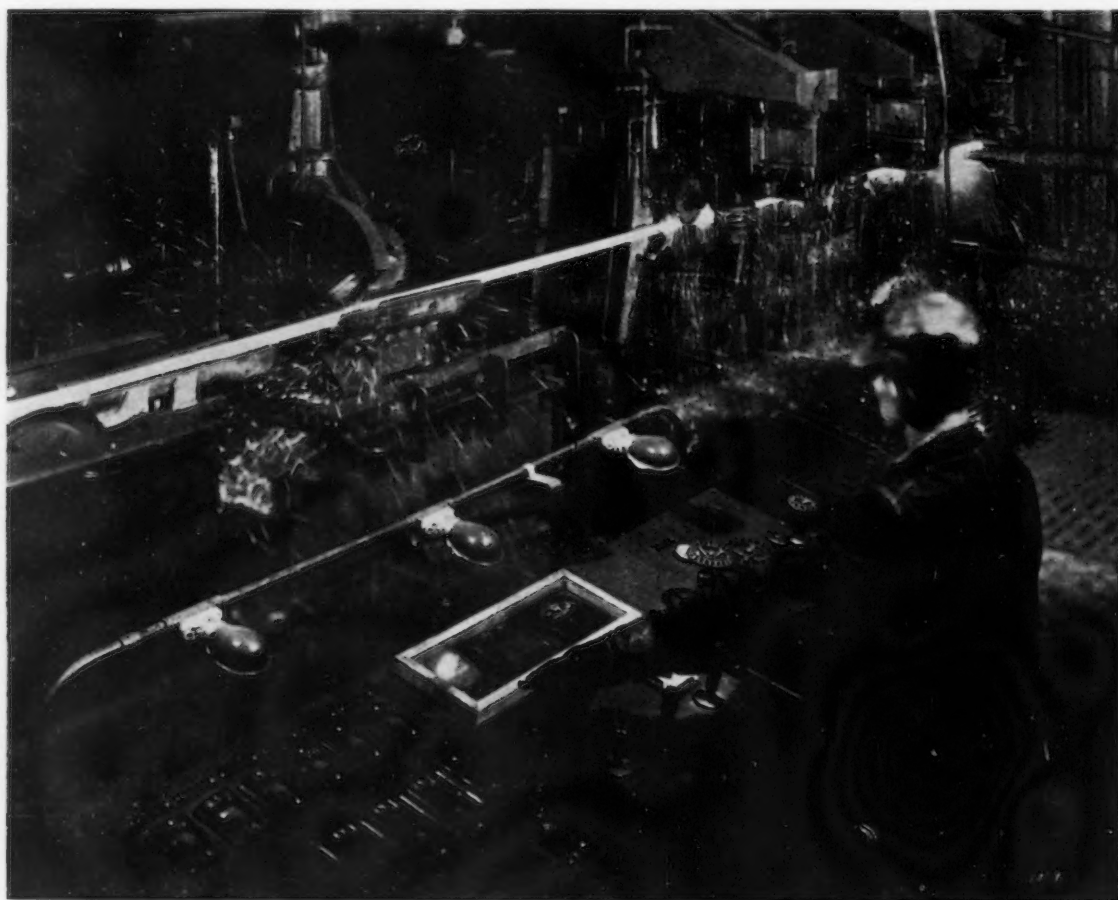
The hot skelp leaves the furnace, passes through the welding head and is hot sawed to length.
